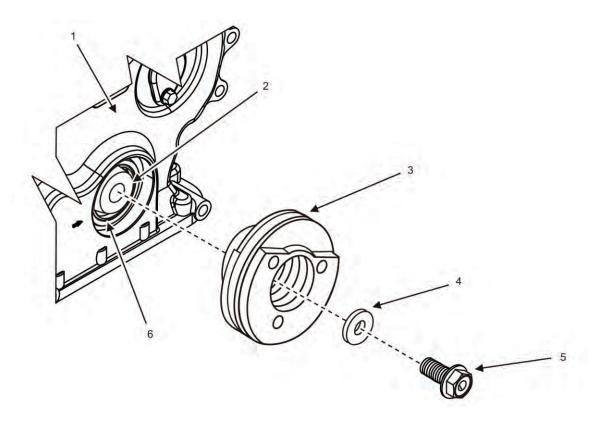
Harmonic Balancer Crankshaft — Alignment.
